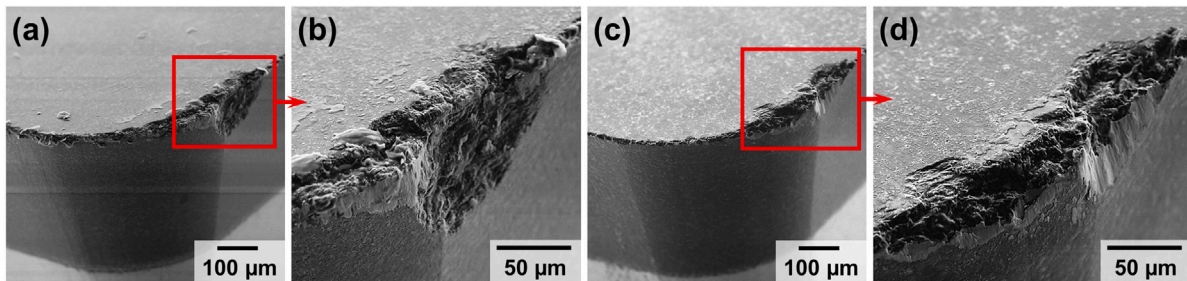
SE images of the (a)–(b) PCD(B) and (c)–(d) PCD(C) cutting edges when machining at 500 m/min, 0.012 mm/z following $t_c = 3.74$ min.
